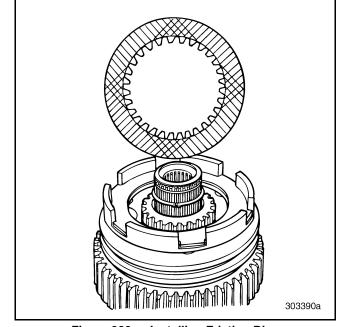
Installing Friction Disc (T313L/T318L Shown)
